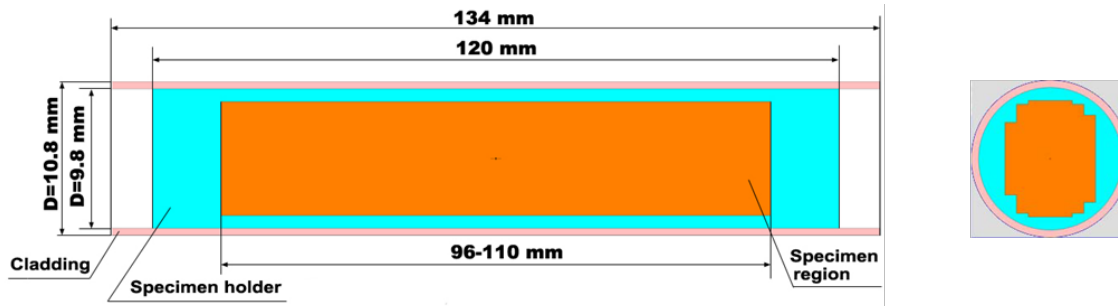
Geometry and dimensions of a specimen rod [8]
